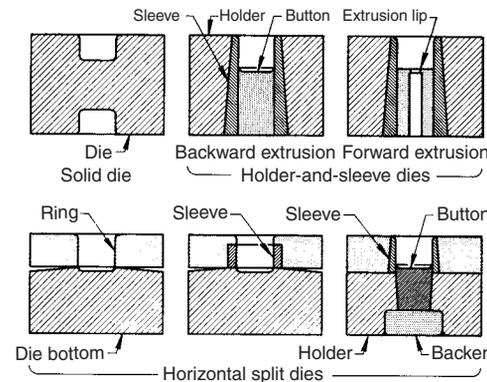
Three types of dies used in the cold extrusion of aluminum alloy parts
